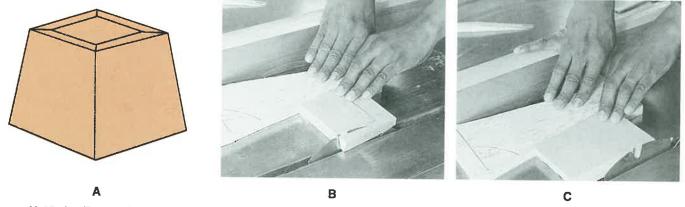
A—Four-sided plinth assembled with compound miter joints. B—Sawing pass one with the 5° taper guide, and with the blade at 44.75°. C—Sawing pass two using the 10° taper guide. The guard was removed to show the operation.
